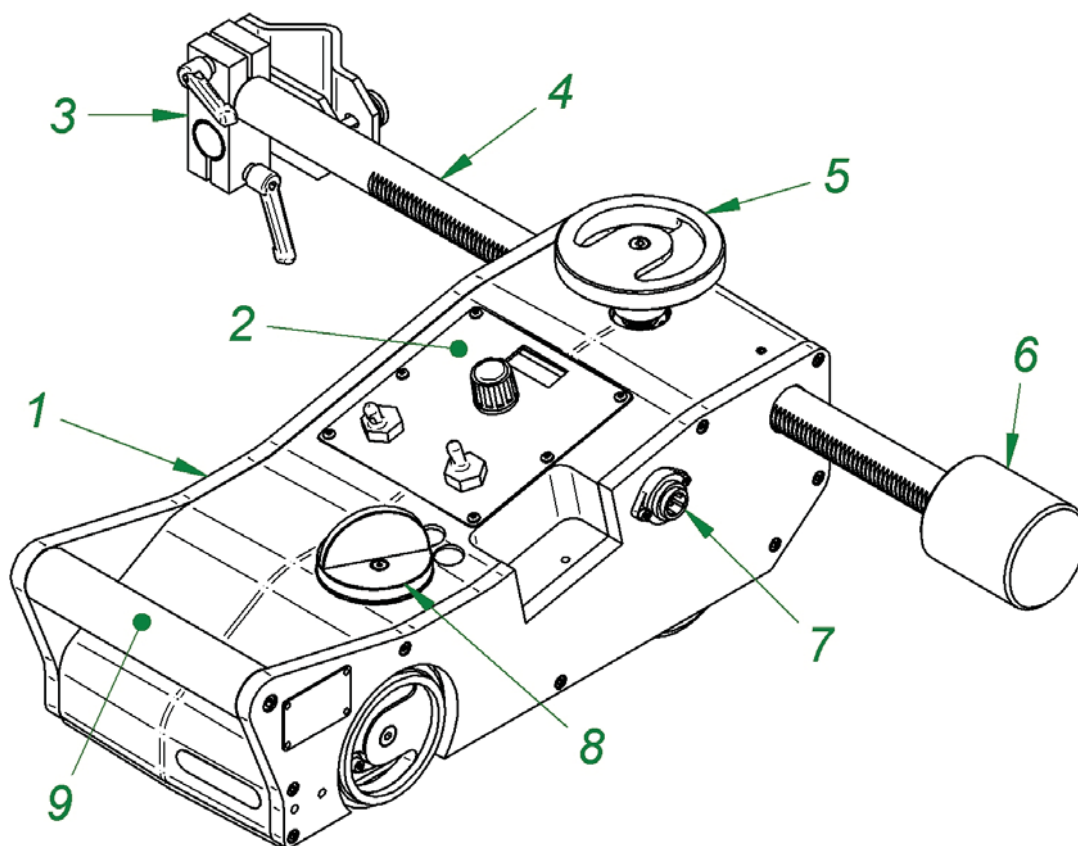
DRAGON flame cutting carriage design: 1 – drive system, 2 – control panel, 3 – angular torch holder, 4 – follower arm, 5 – follower arm position handwheel, 6 – counterweight, 7 – power supply socket, 8 – coupling knob, 9 – carrying handle
